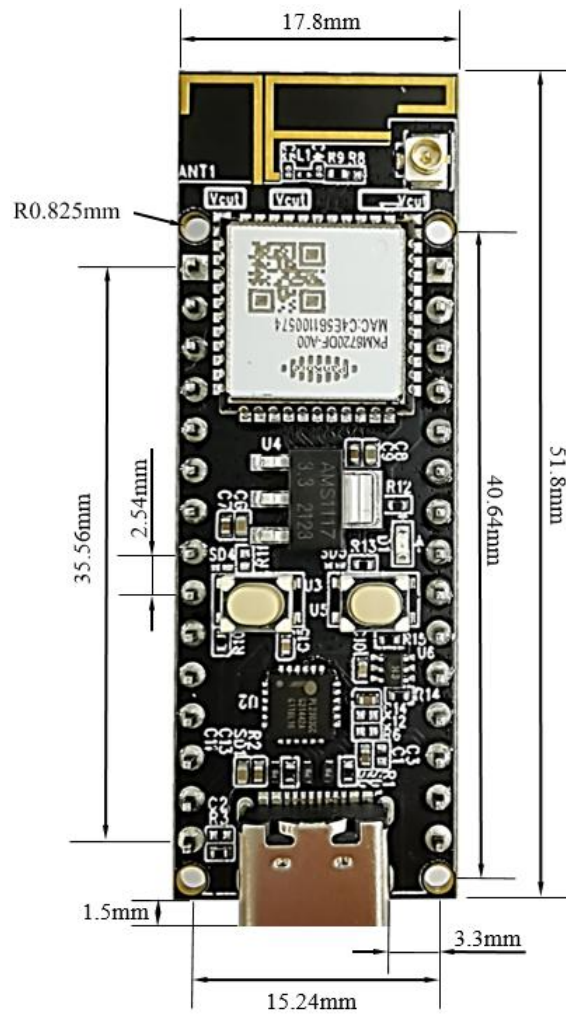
PKE8720DF-A00-F10 Board Dimensions
